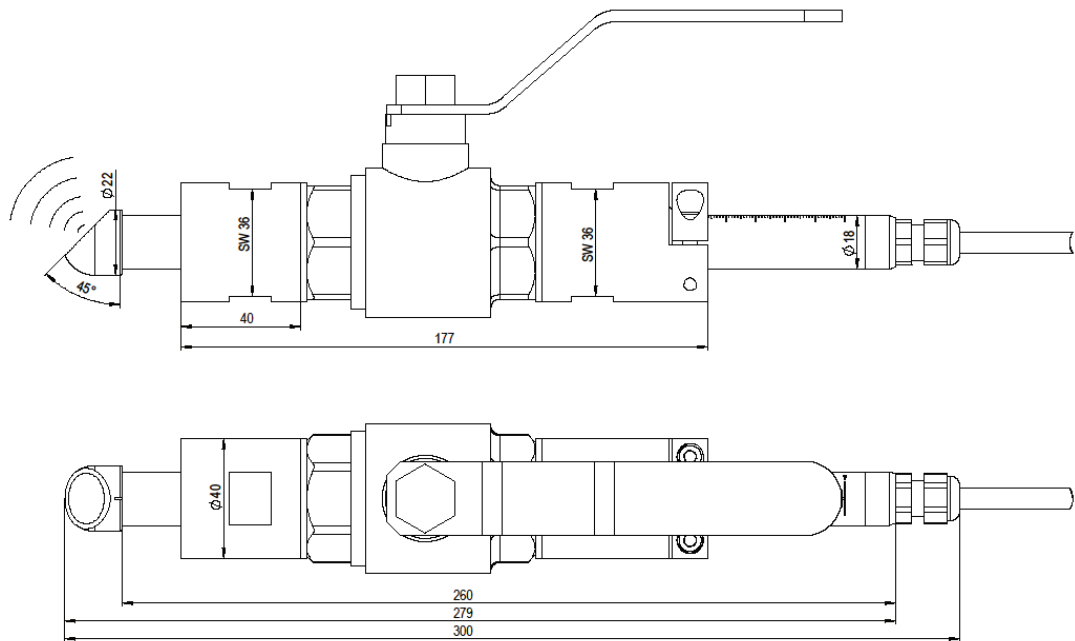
Dimensions pipe sensor type TSP0V200RL
